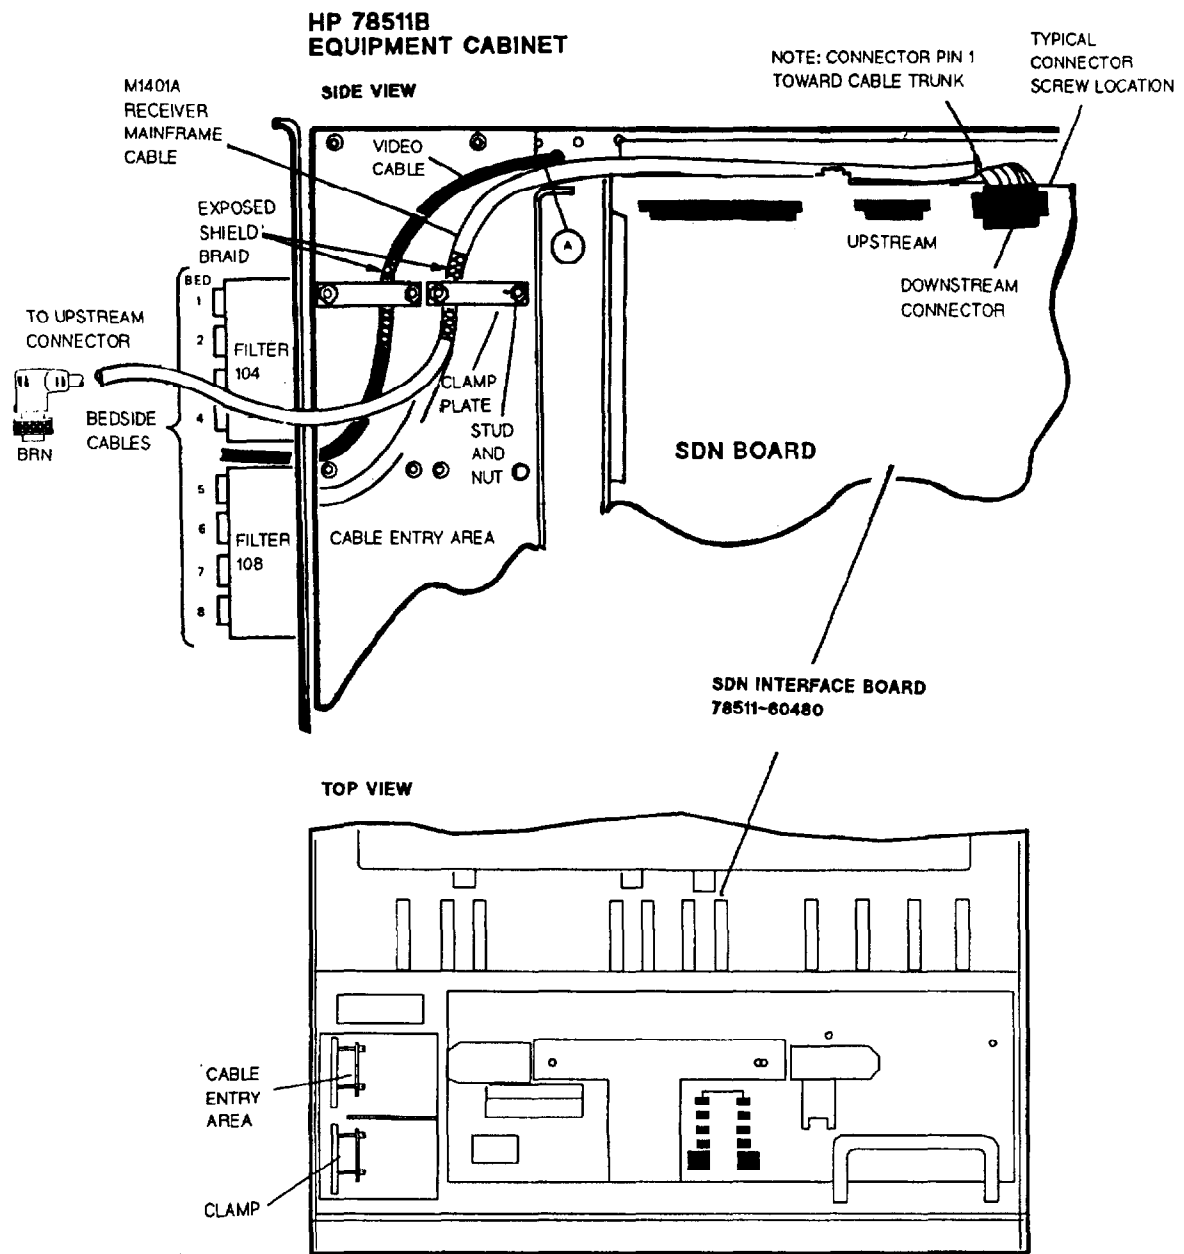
HP 78511B Equipment Cabinet Cable Installation
